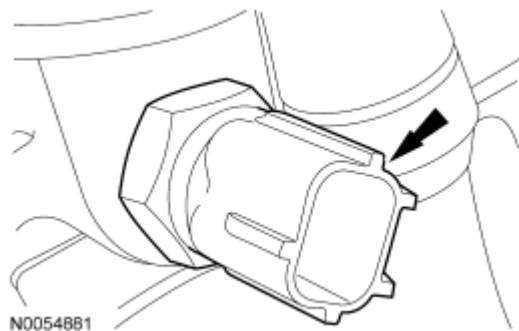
Identifying Cylinder Head Temperature (CHT) Sensor
